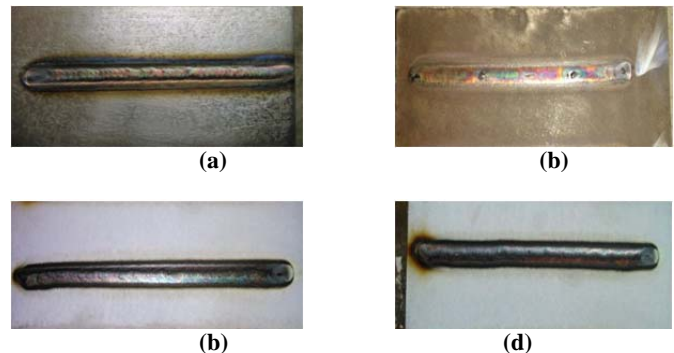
photograph of weld bead on workpiece (a) without flux (b) MnO₂ flux (c) TiO₂ flux (d) SiO₂ flux
